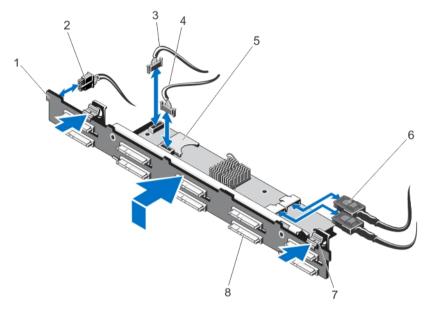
Removing and installing the 2.5 inch hard-drive backplane
